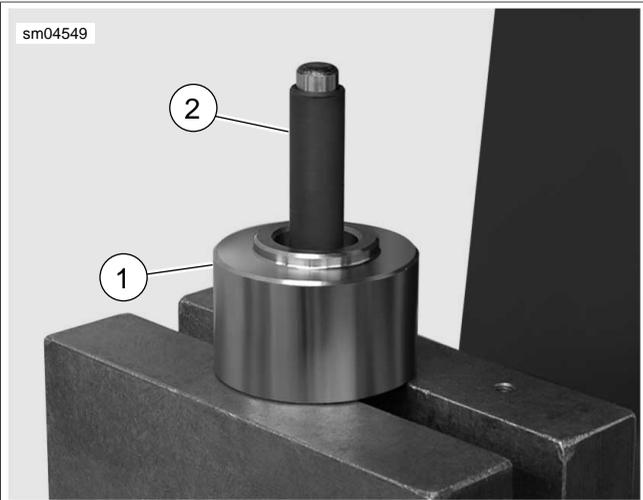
Rear Wheel Compensator Bearing Remover/Installer (HD-48921)
